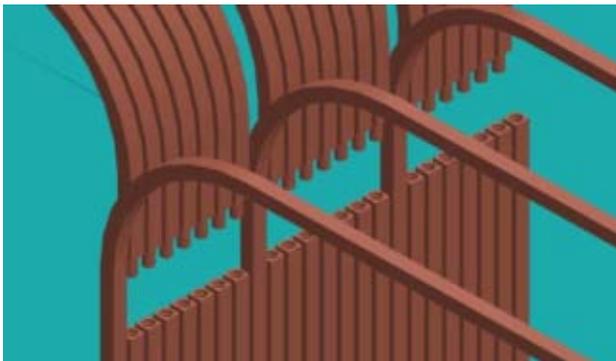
Top assembly of coils which will have total 152 brazing joints to be done in-situ and required for finalising QAP.
